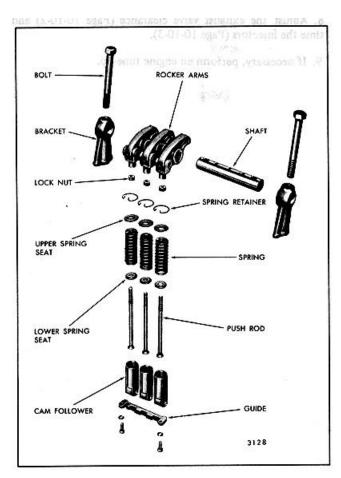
Valve and Injector Operating Mechanism and Relative Location of Parts
